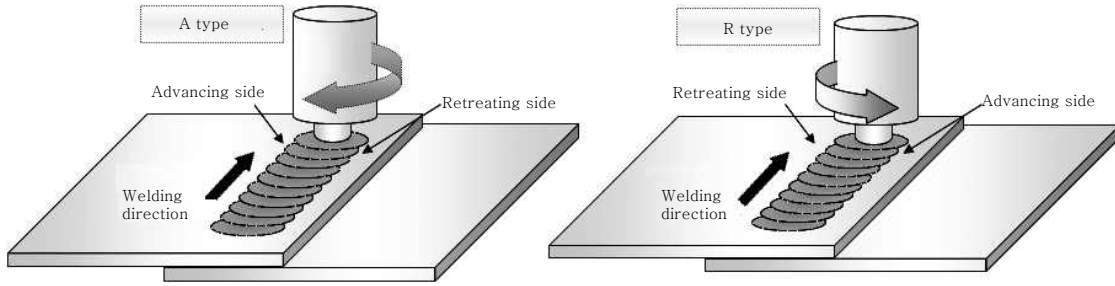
Schematic of lap joint constructions : 'A-type' - fractured in advancing side, 'R-type' - fractured in retreating side for tensile test
